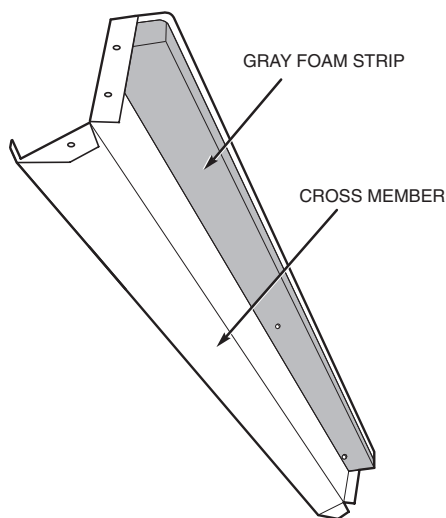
Adding Seal Strip to Sides of Hood Top Mounting Flange
